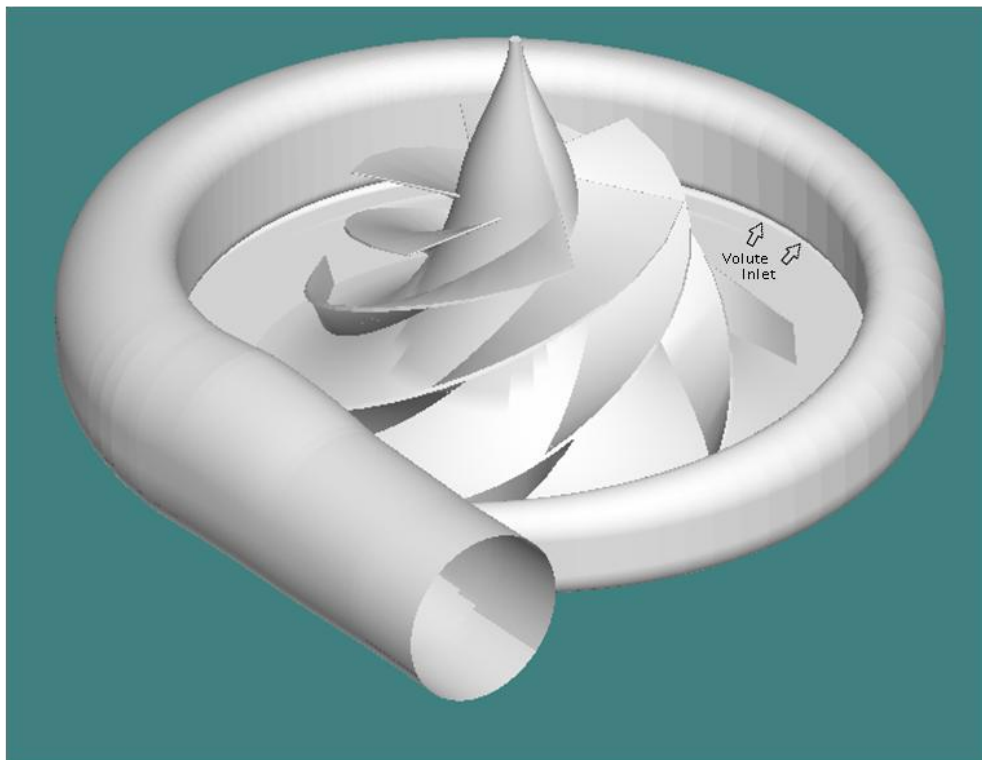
Fuel pump arrangement showing impeller, vaneless diffuser gap and volute.
